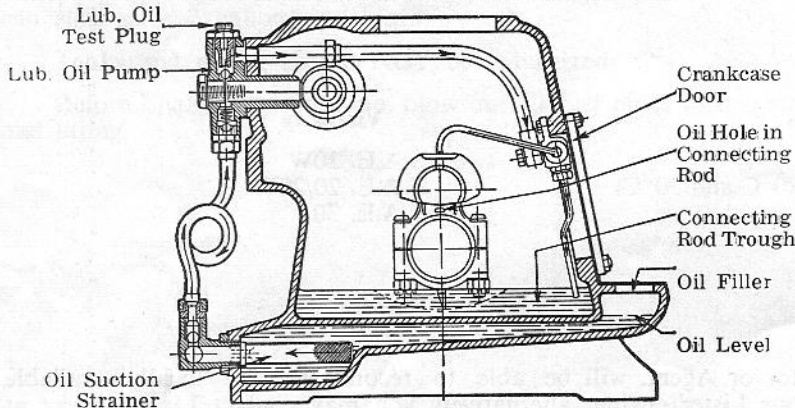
Lubricating Oil System, 12/2 & 16/2
